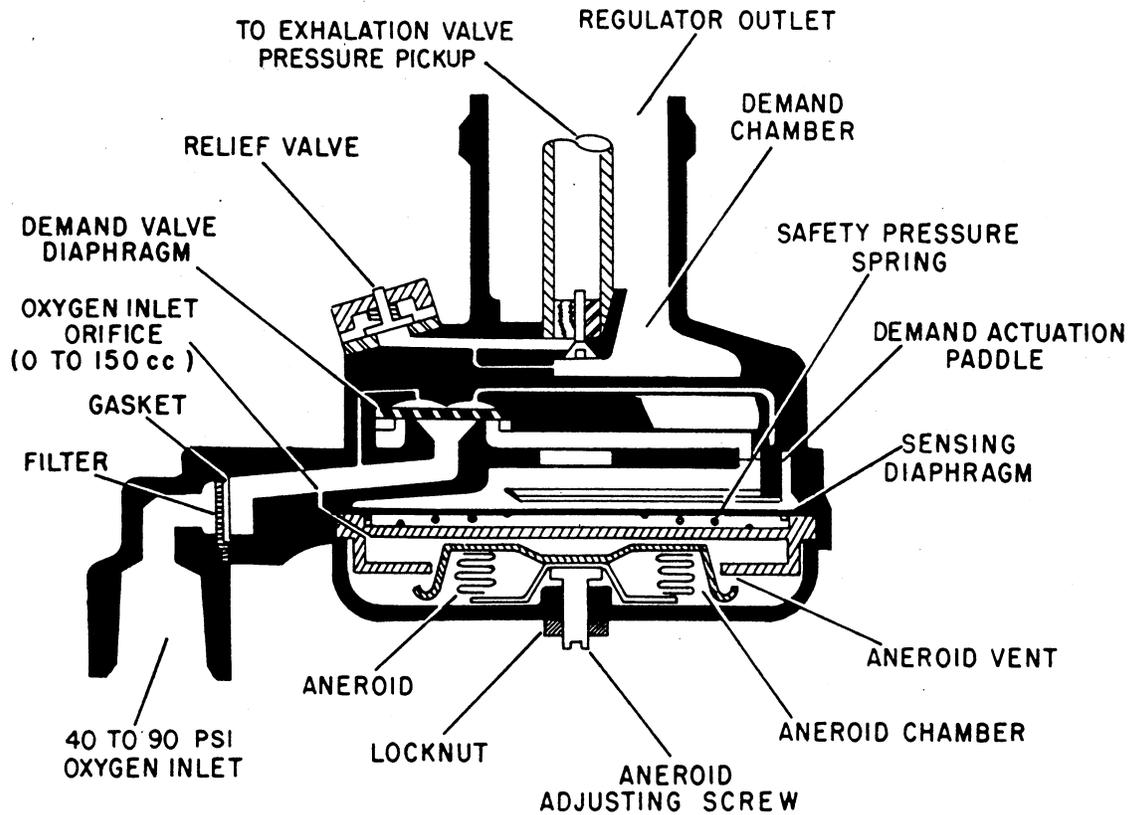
Cutaway view of miniature oxygen regulator.
